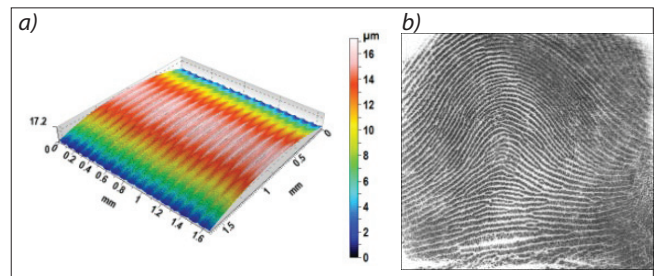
(a) Isometric image of the surface after turning; (b) fingerprint used in dactyloscopy
